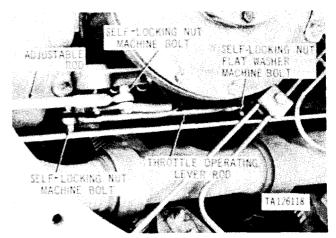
Removing or installing adjustable rod and throttle operating lever rod.
